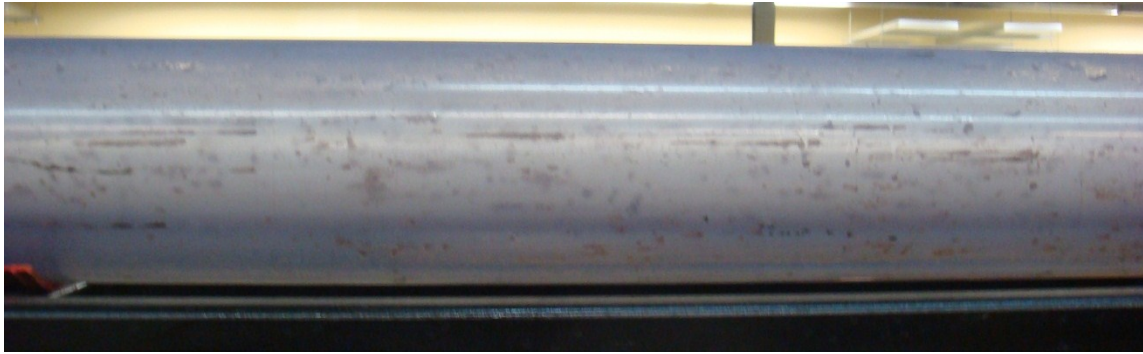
Adhesion of epoxy for a vertical pipe at bottom section.
